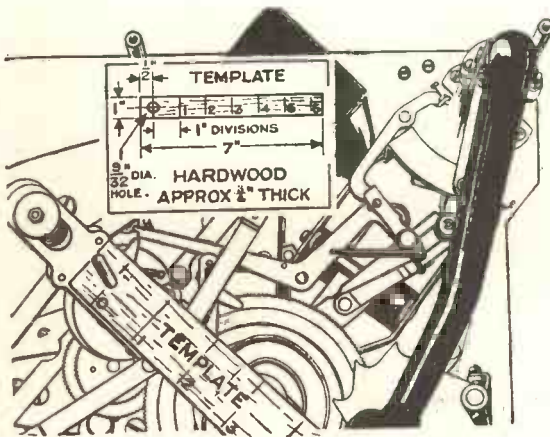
A.—THIS SHOWS THE TEMPLATE IN POSITION FOR SETTING INNER DIAMETER ADJUSTING SCREW.
